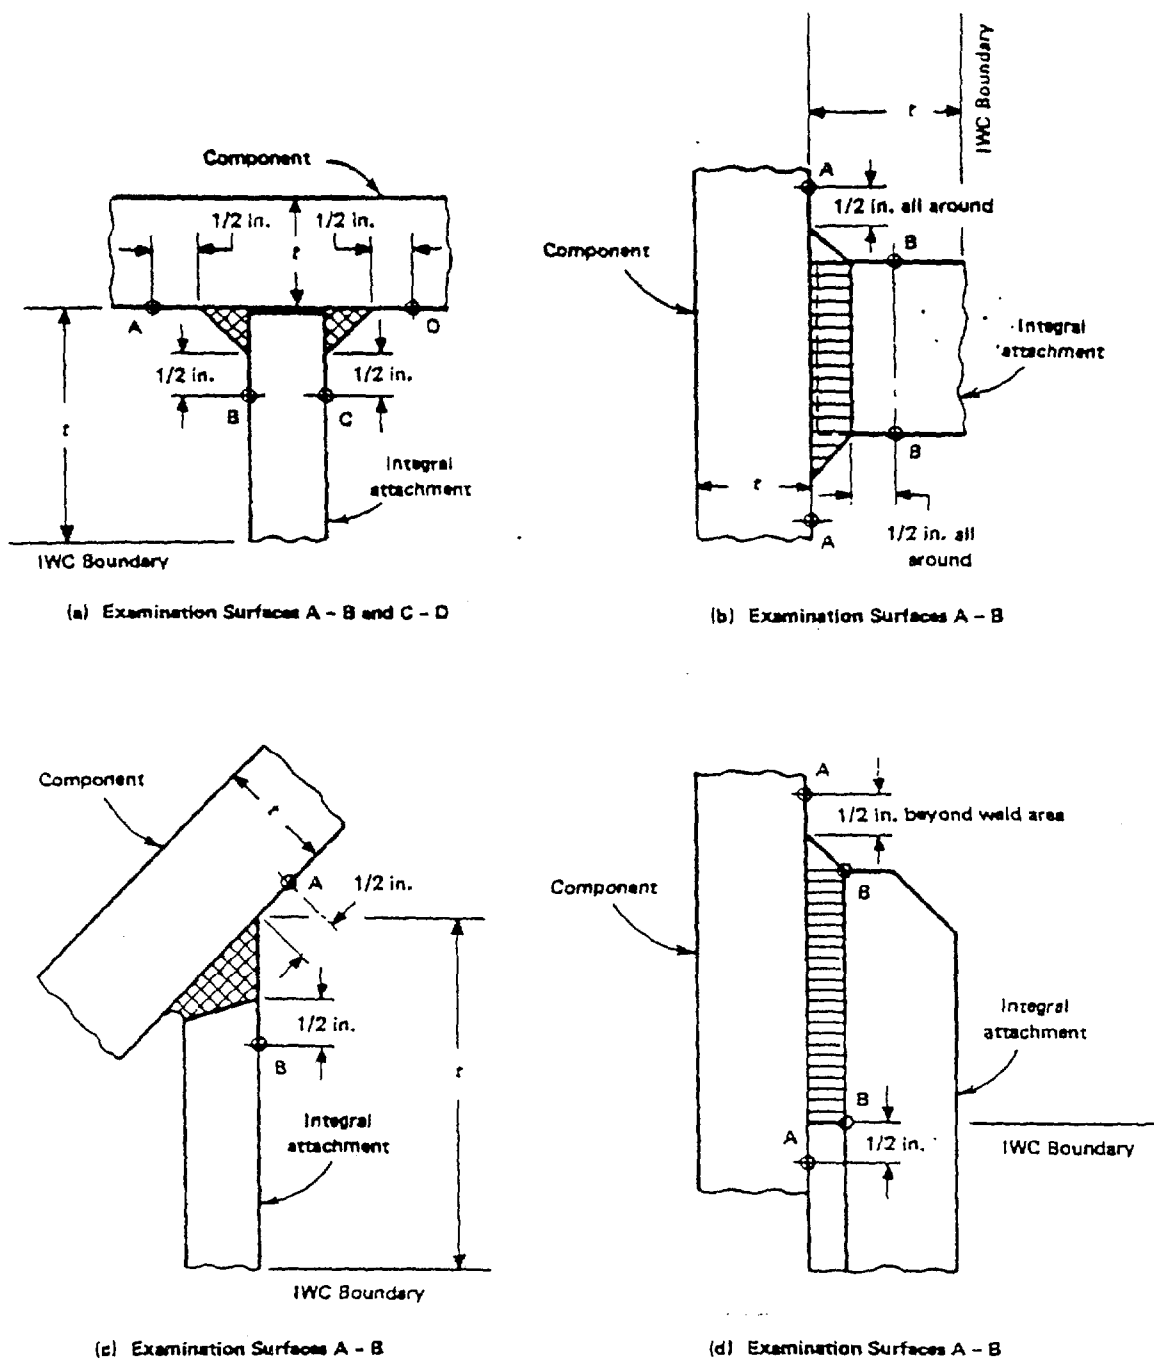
INTEGRALLY WELDED ATTACHMENTS
